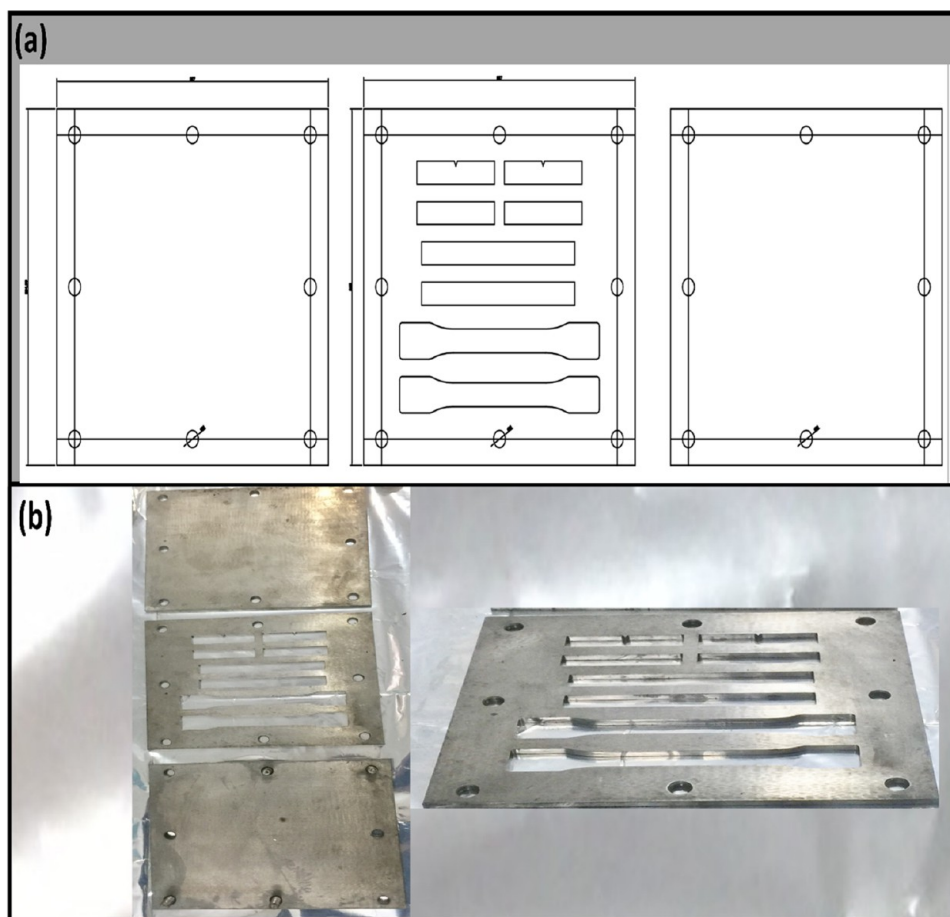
Steel mold used to fabricate the cement polymer composites: (a) design and (b) manufactured.
